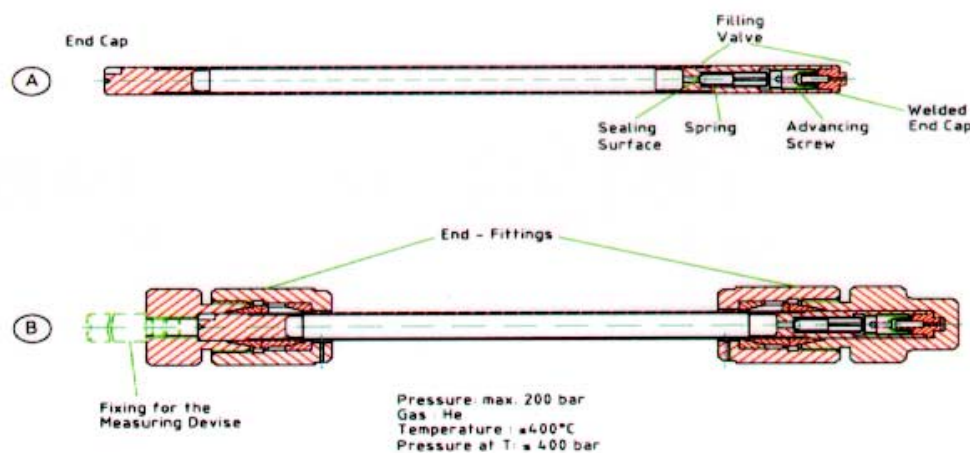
Creep samples(a) with the end-caps welded and the filling-valve, and (b) with the end-fittings.
